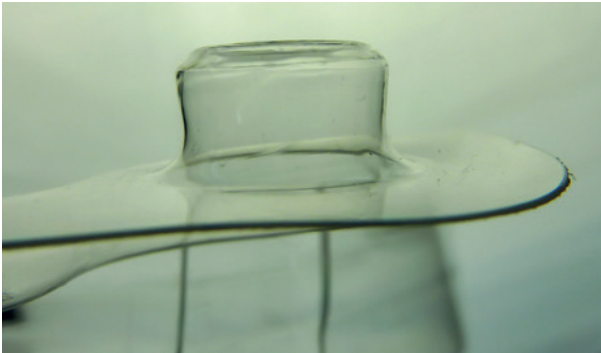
Push button positive section of clamshell package in Figure 2.18
